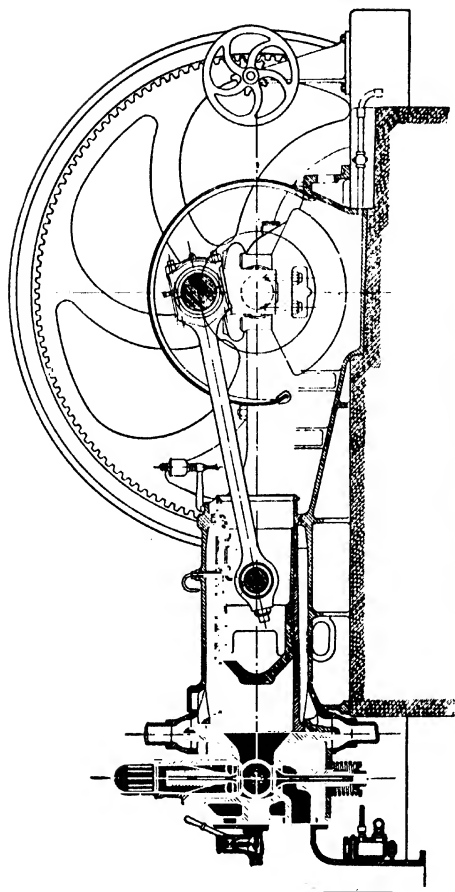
Sectional Elevation of New Crossley Oil Engine
